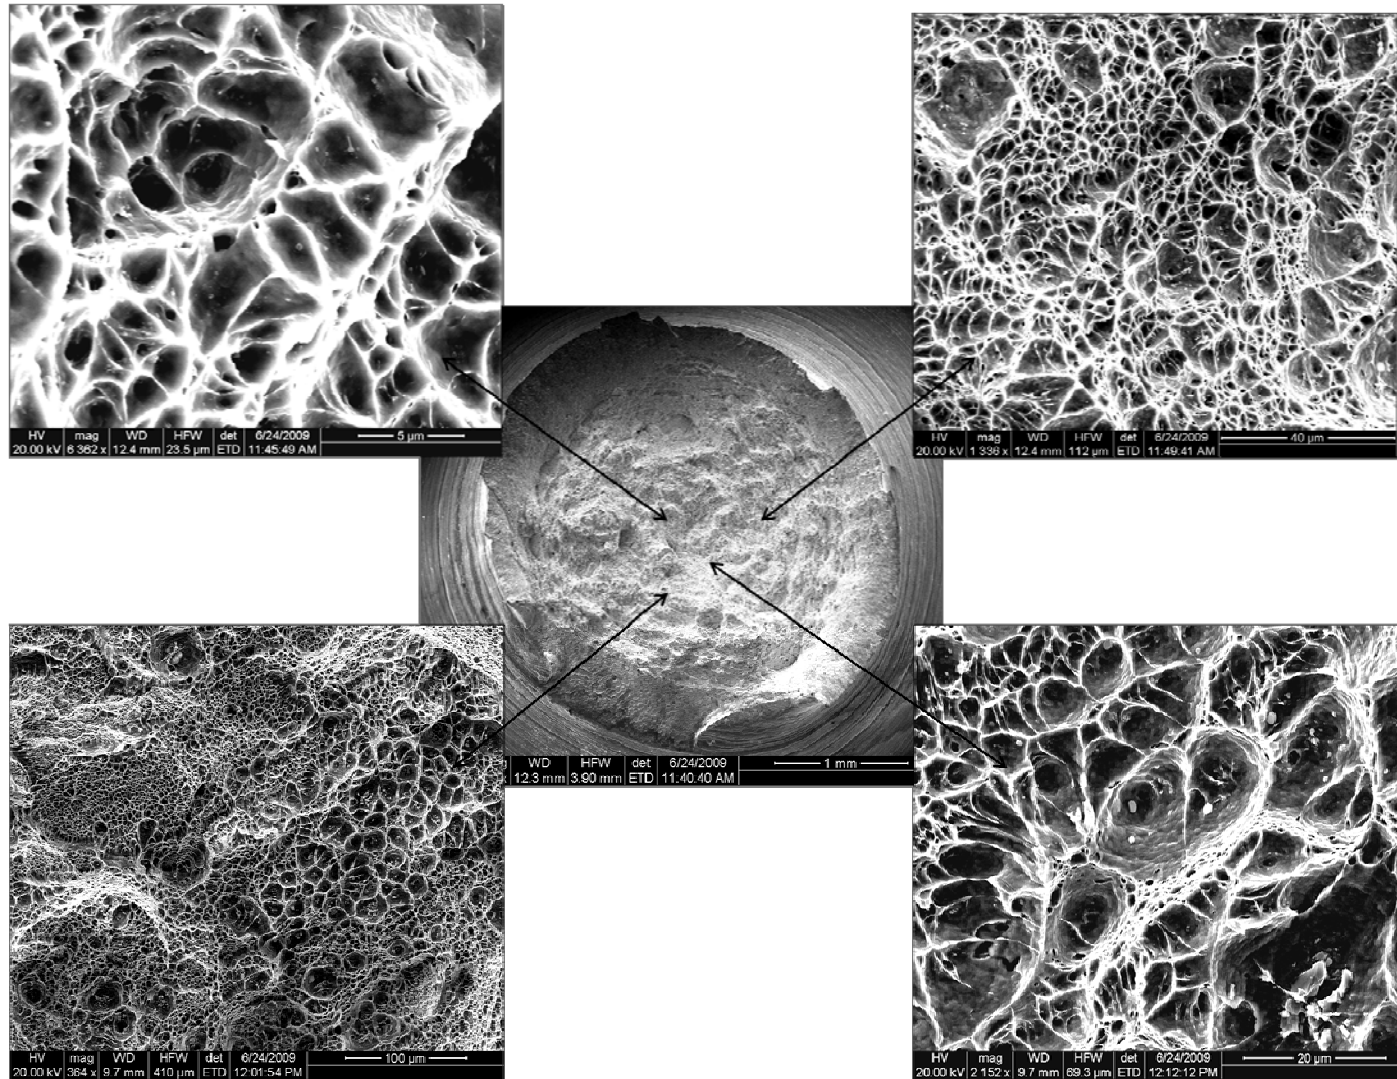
Fracture surfaces taken from the broken sharp notched bar sample 3T4-R.
